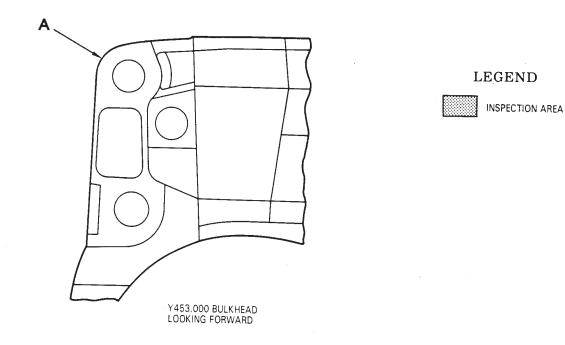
Center Fuselage Bulkhead Y453.000, Upper Flange Step and Transition Radii; Inspection Areas and Typical Flaws
